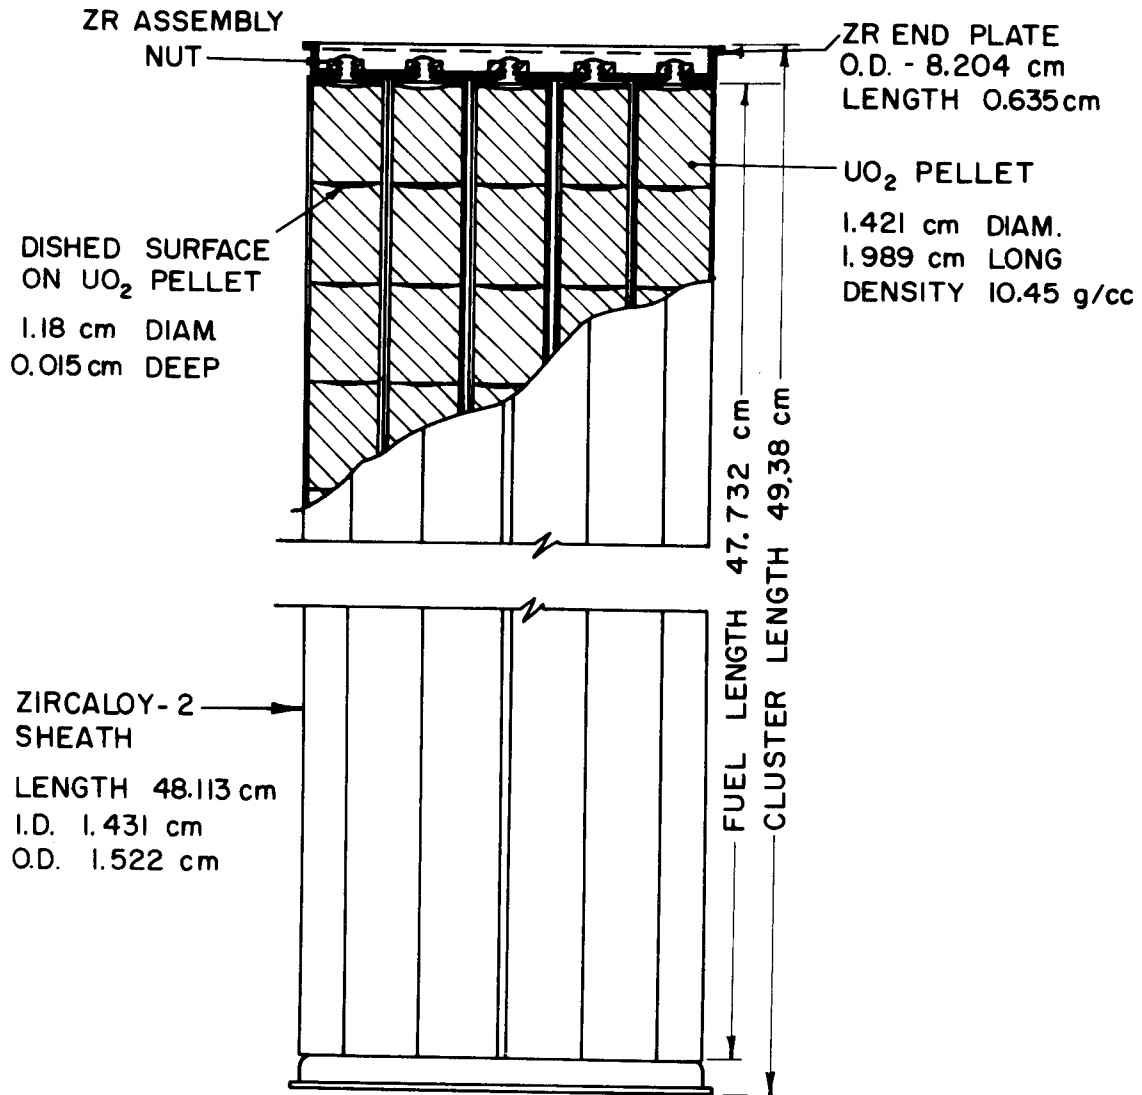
DETAILS OF 19-ROD FUEL BUNDLE
